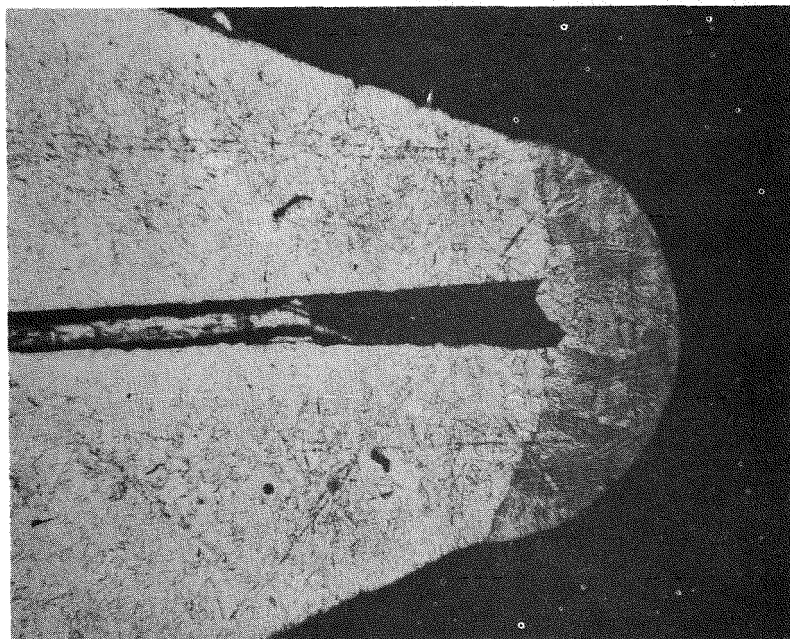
UNSUCCESSFUL WELD X80
